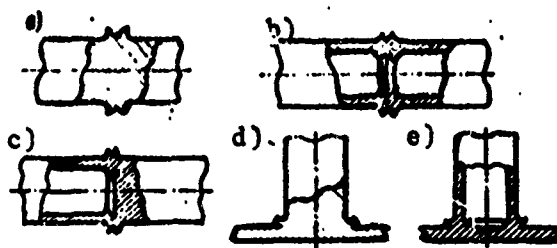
Types of welded joints done by friction welding: a-rods butt to butt; b-pipes butt to butt; c-rod and pipe butt to butt; d and e-T-shape joints of rod and pipe with flat surface part.
